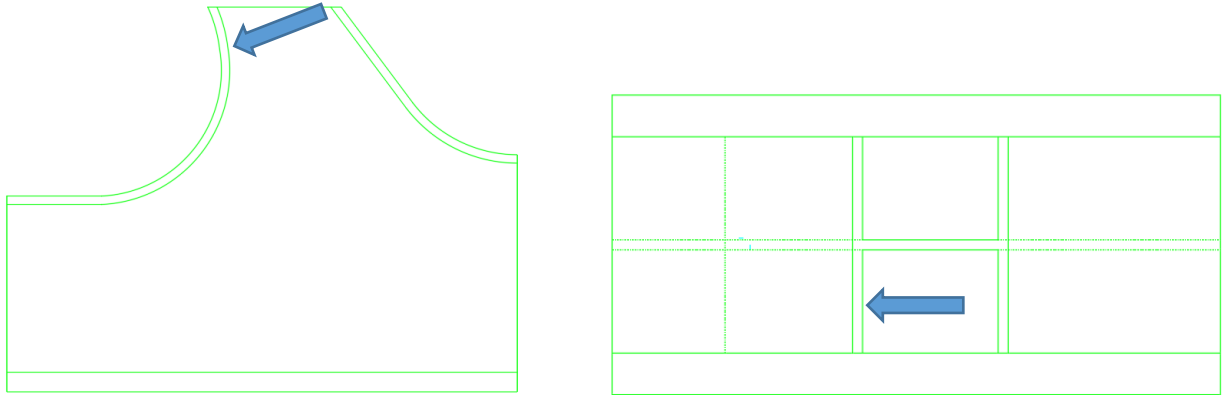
Residual Hole Location 1 - Elevation (left), Plan View (right)
